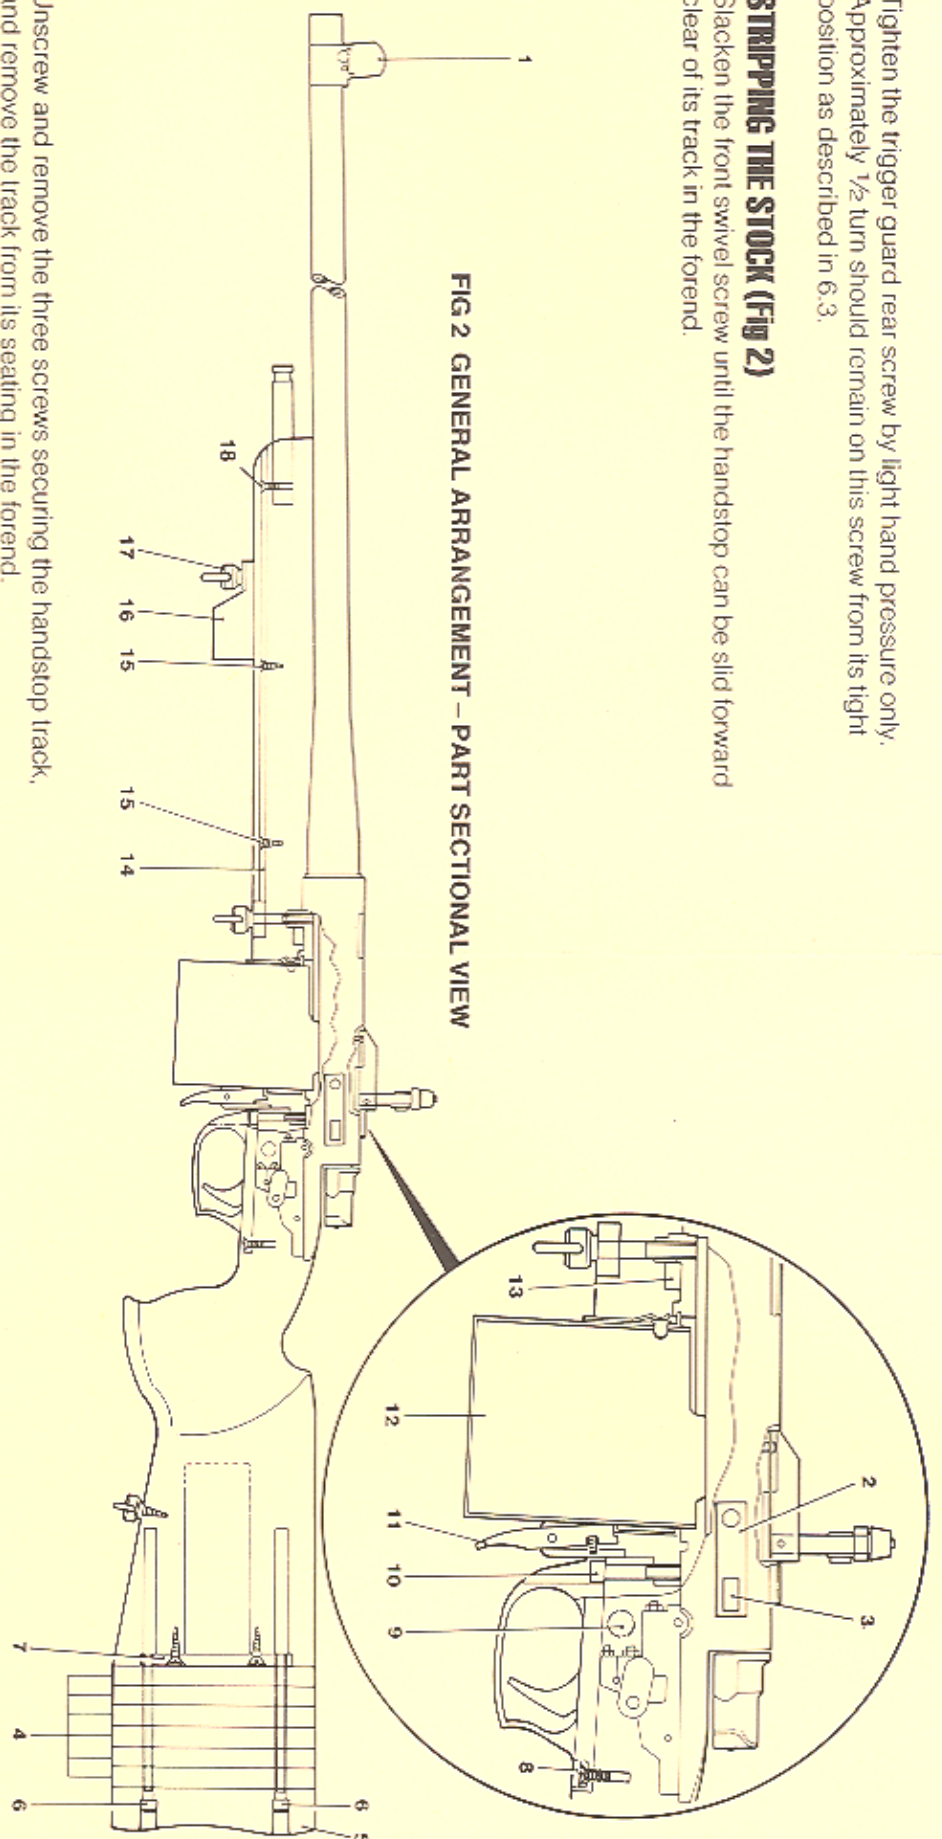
GENERAL ARRANGEMENT - PART SECTIONAL VIEW
